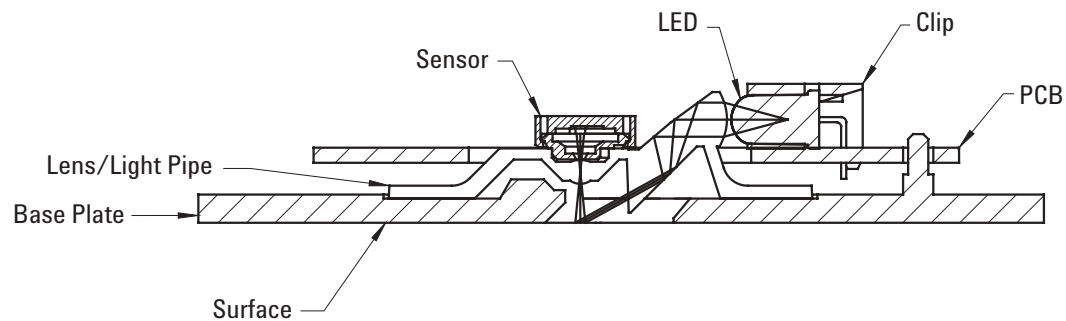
Sectional view of PCB assembly highlighting all optical mouse components (optical mouse sensor, clip, lens, LED, PCB, and base plate) in the mouse.
